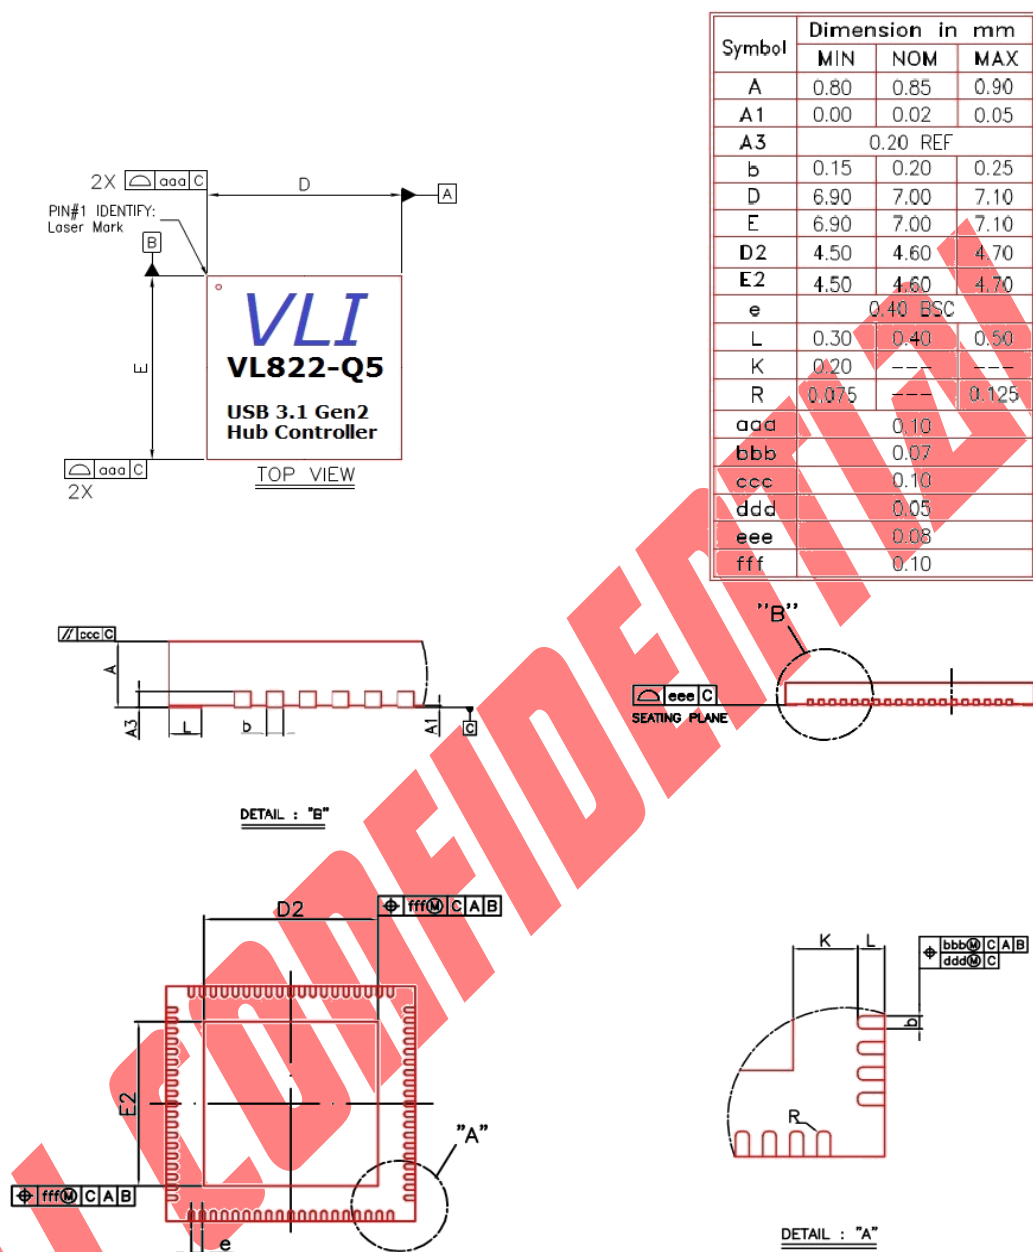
Mechanical Specification – Q5 (QFN 56L 7x7x0.85 mm) Package
